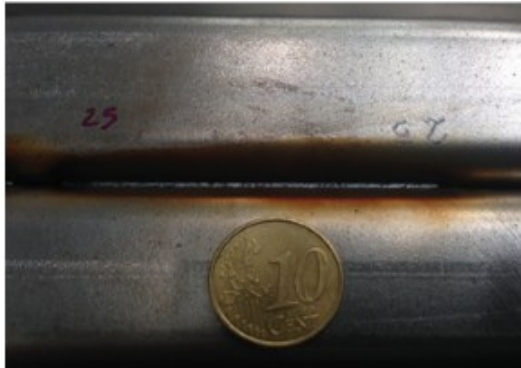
Welding on bop configuration, P=3Kw, V= 30 mm/s
